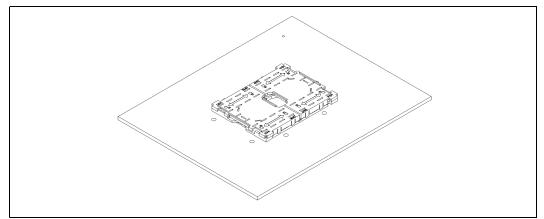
Processor and Enabling Components Mechanical Assembly
